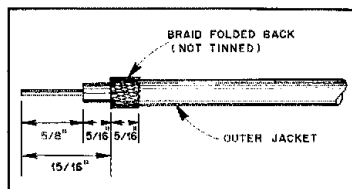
Cable prepared for connector mounting per KG6QY's suggestion.
